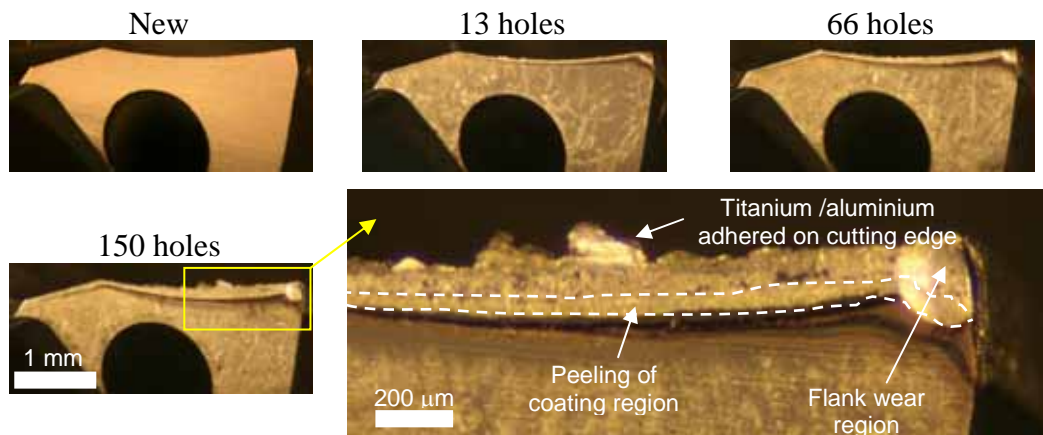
Tool wear evolution for Test 3 (C7 – 83/30 m/min – 0.15 mm/rev – wet cutting)
